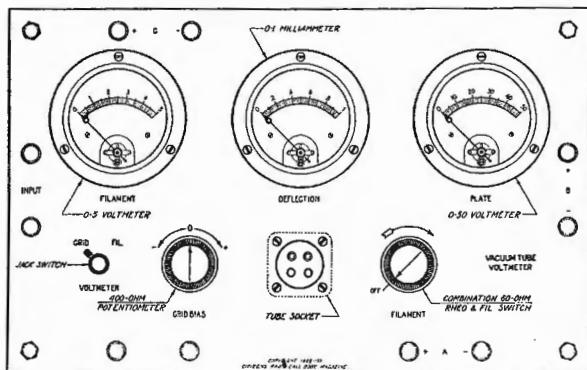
In this drawing the builder may see the manner in which the parts are laid out
